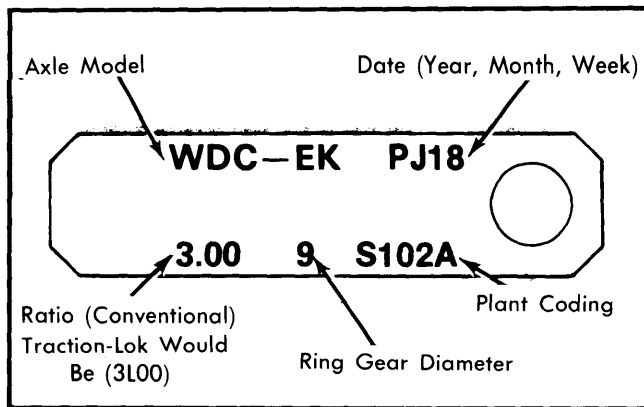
Ford Motor Co. Rear Axle Identification Tag
